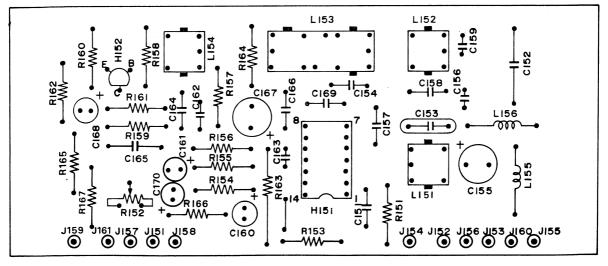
AM Tuner Unit Assembly P150 Component Locations
